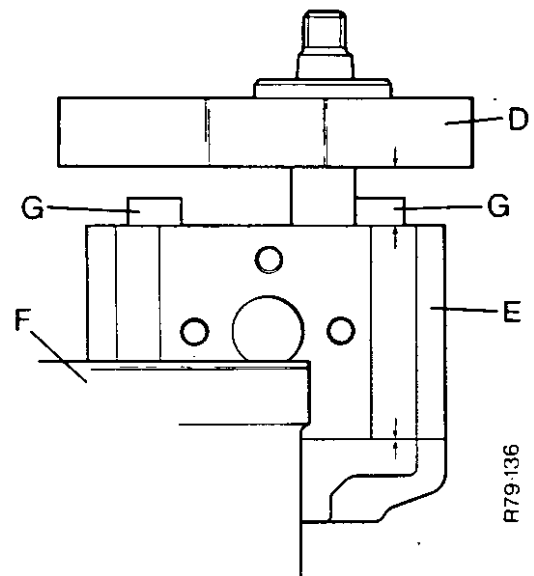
REMOVAL OF THE PUMP FLANGE
